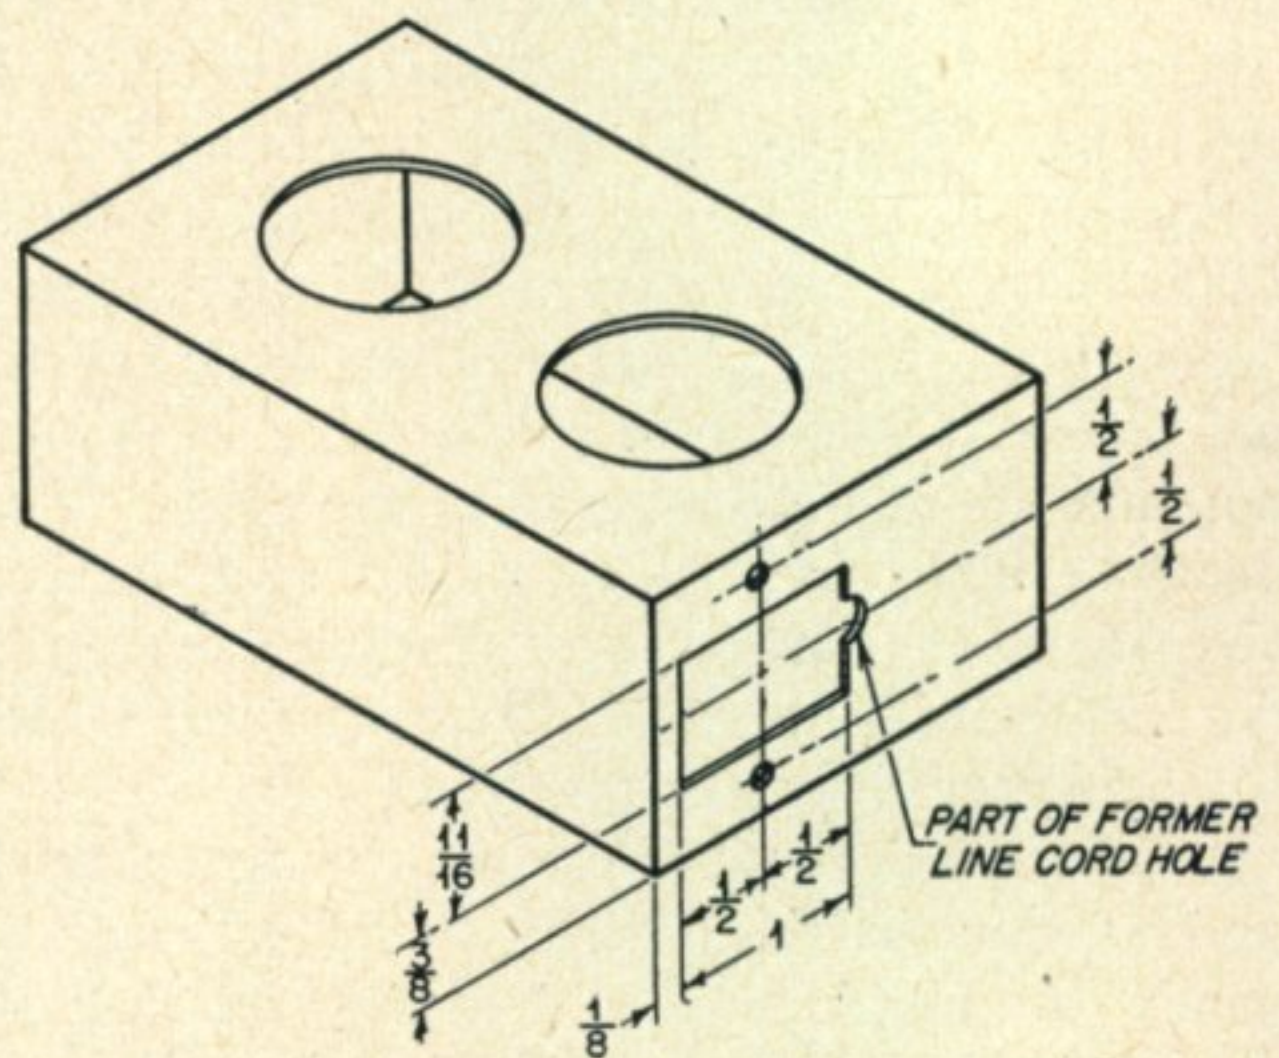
The hole for the Jones socket is cut out according to the drawing shown above.
